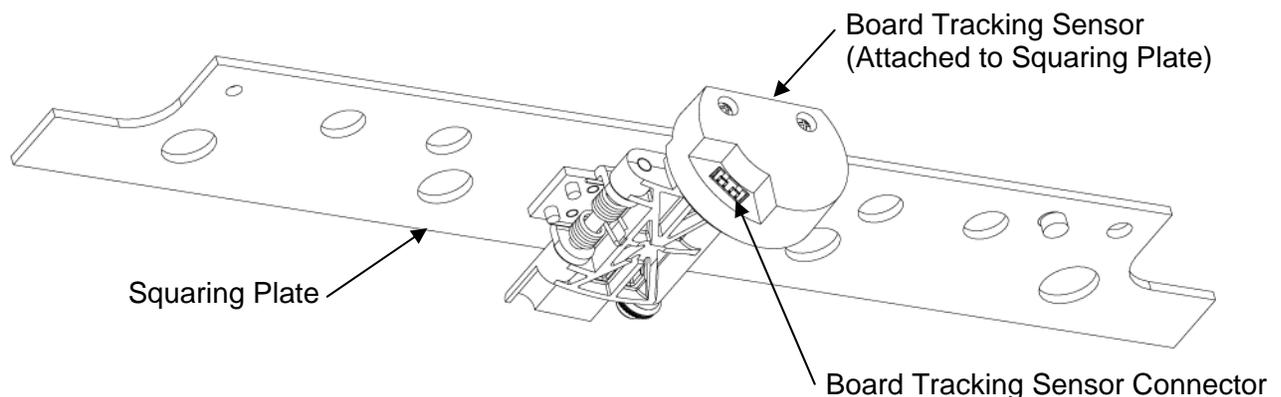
SQUARING PLATE ASSEMBLY (UNDERNEATH VIEW)
